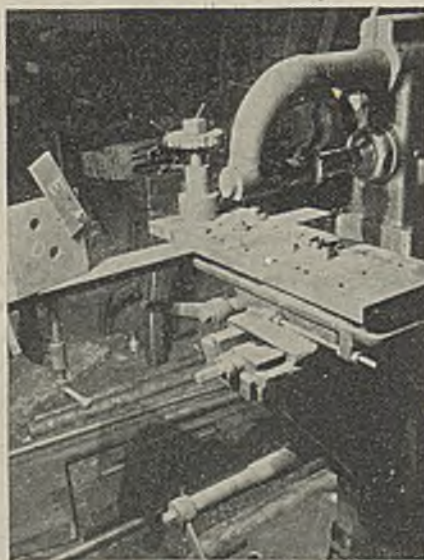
Showing equipment employed to hold gear firmly while new teeth are being cut
